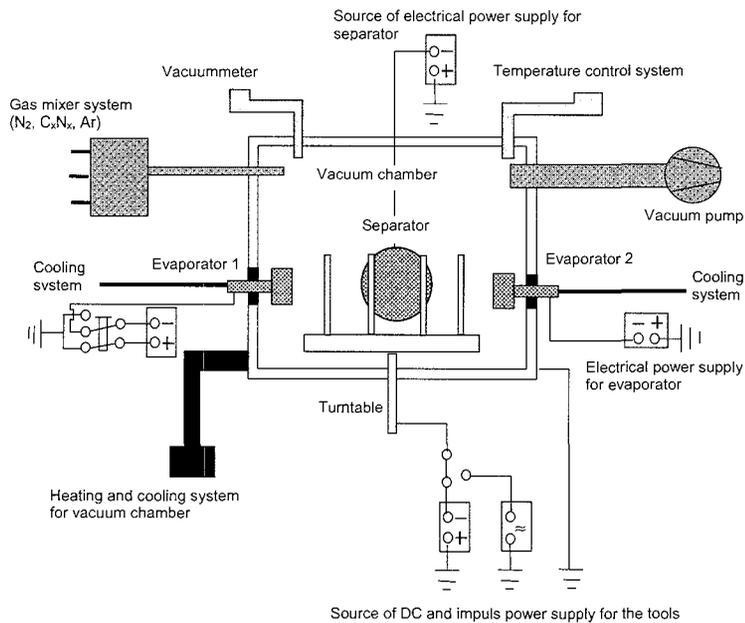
Schematic drawing of a vacuum-arc unit for combined ion plasma surface processing (CIPP) of cutting tools
